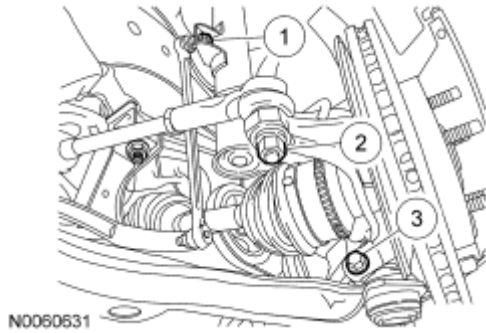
Identifying Sway Bar Link, Nut And Bolt
